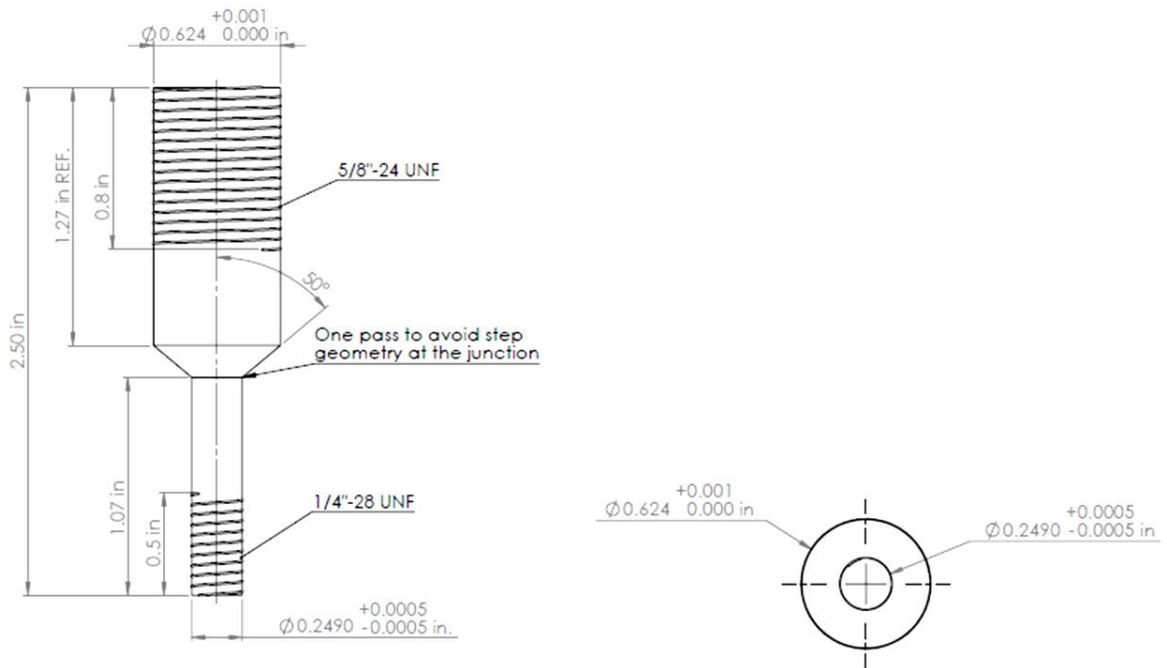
Single lap shear test fixture with dimensions in inches.
